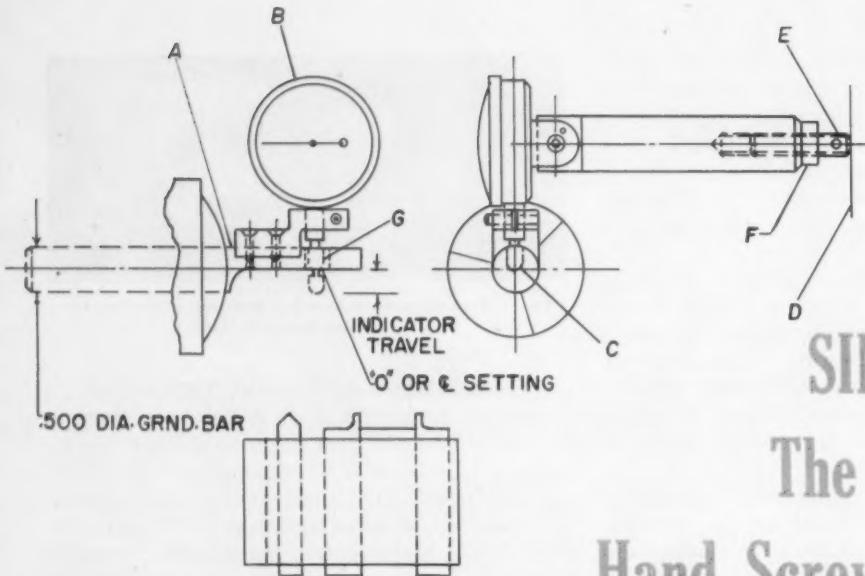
Fixture that speeds accurate setting of tooling on hand screw machines.
